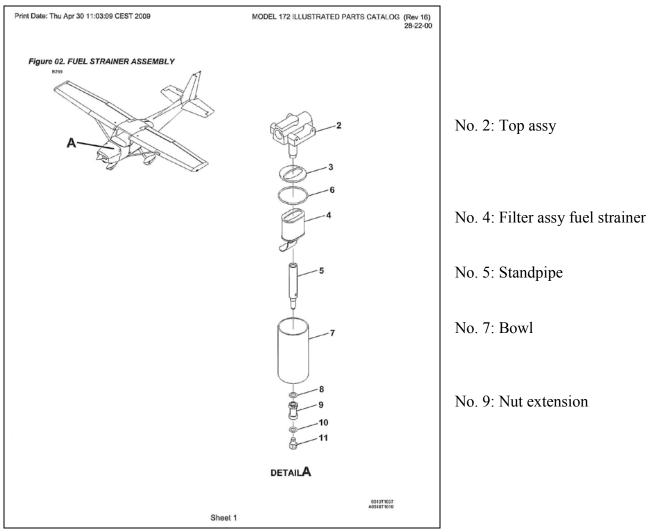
Schematic drawing of the fuel strainer in the parts catalogue.
